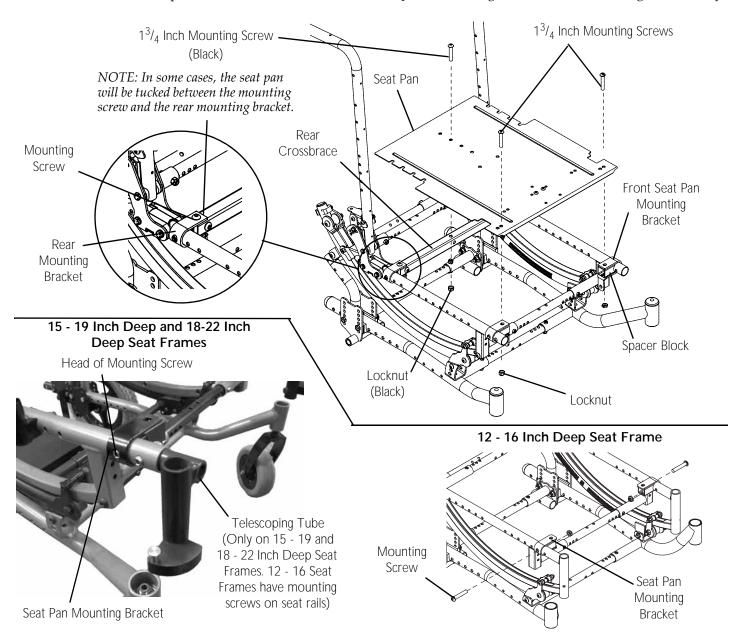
Install the Seat Pan - Flush Mount - Seat Pan
